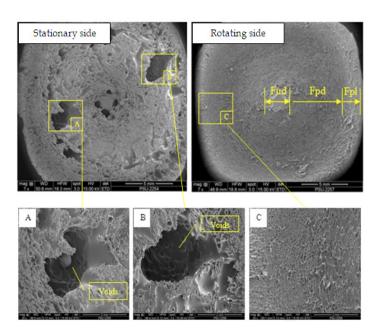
SEM tensile fracture surface morphologies from both rotating side and stationary side for 1800 rpm/2.2 mm.
